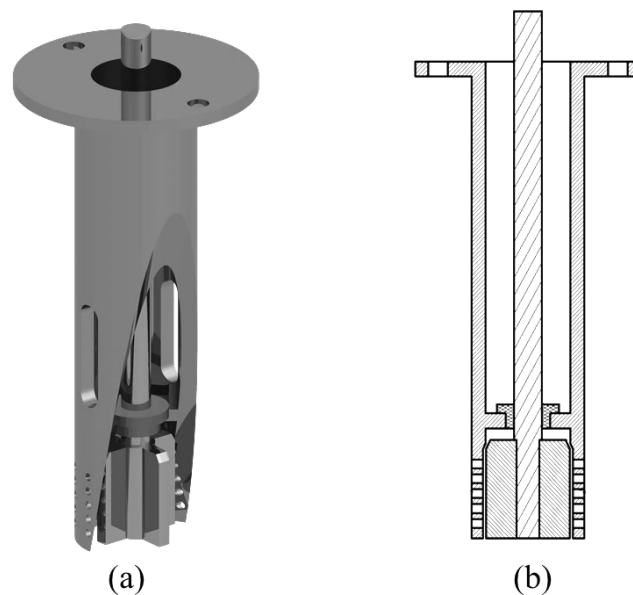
Schematic drawing of the high shear mixer device [128, 131].
